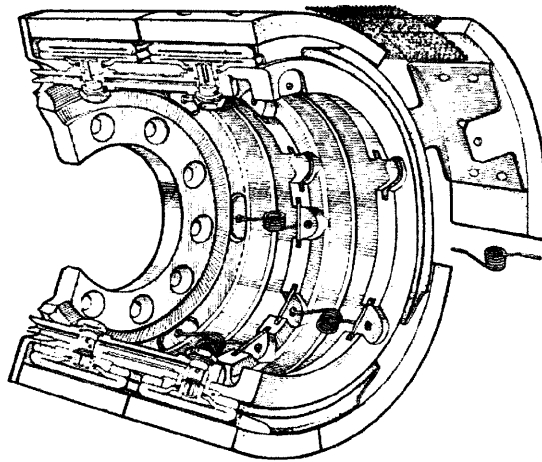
Bag Actuated Drum Brake or just Bag Brake (Dunlop)
